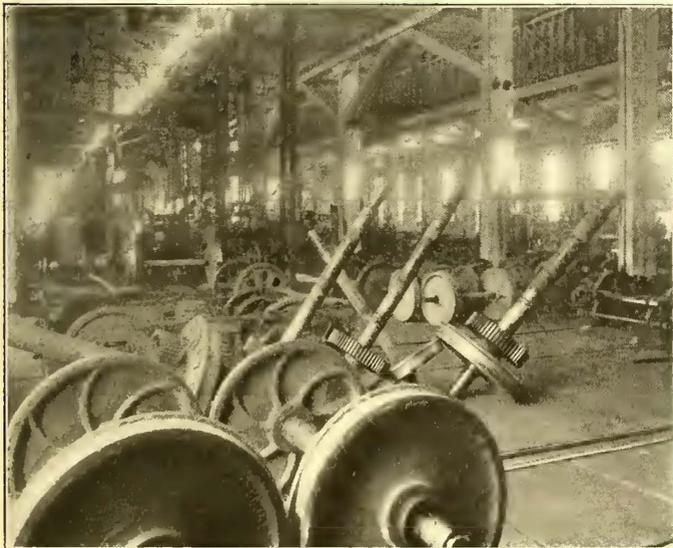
MACHINE SHOP, MACHINE TOOL SIDE
